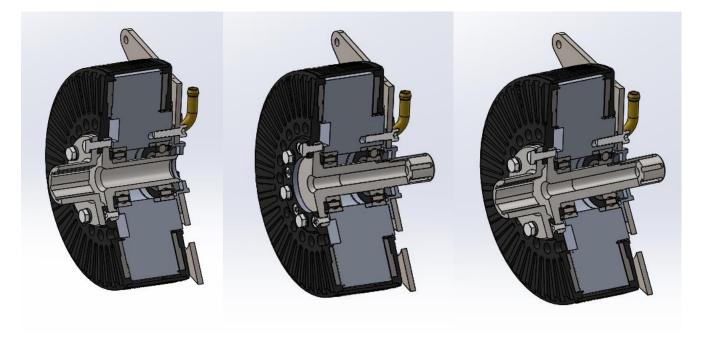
SS+FSI (front power output) Figure 19: ESO (back power output) Figure 20: ESO+FSI (back and front power output)
